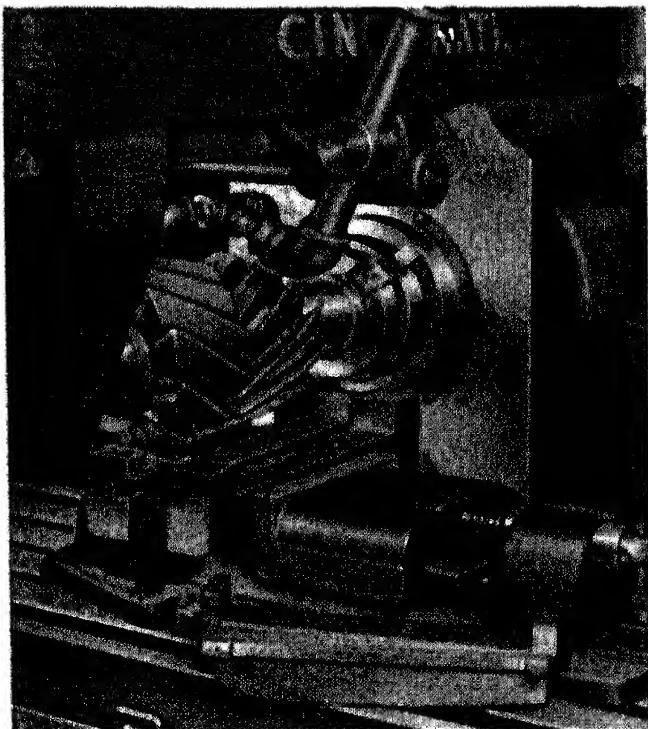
A plain milling vise with special jaws for holding an irregular workpiece. (Courtesy The Cincinnati Milling Machine Co.)
